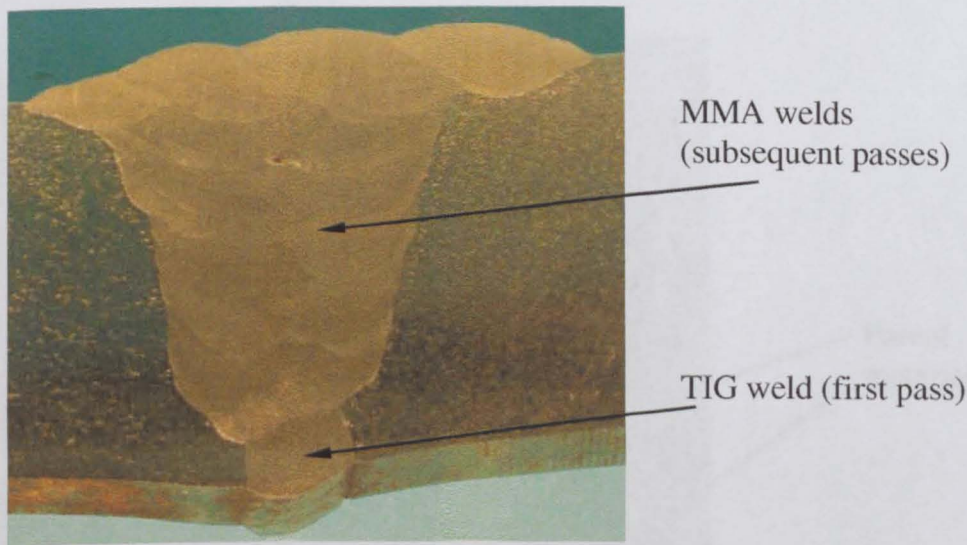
A macrograph showing the fusion boundary of weld and the positions of TIG and MMA welds.
